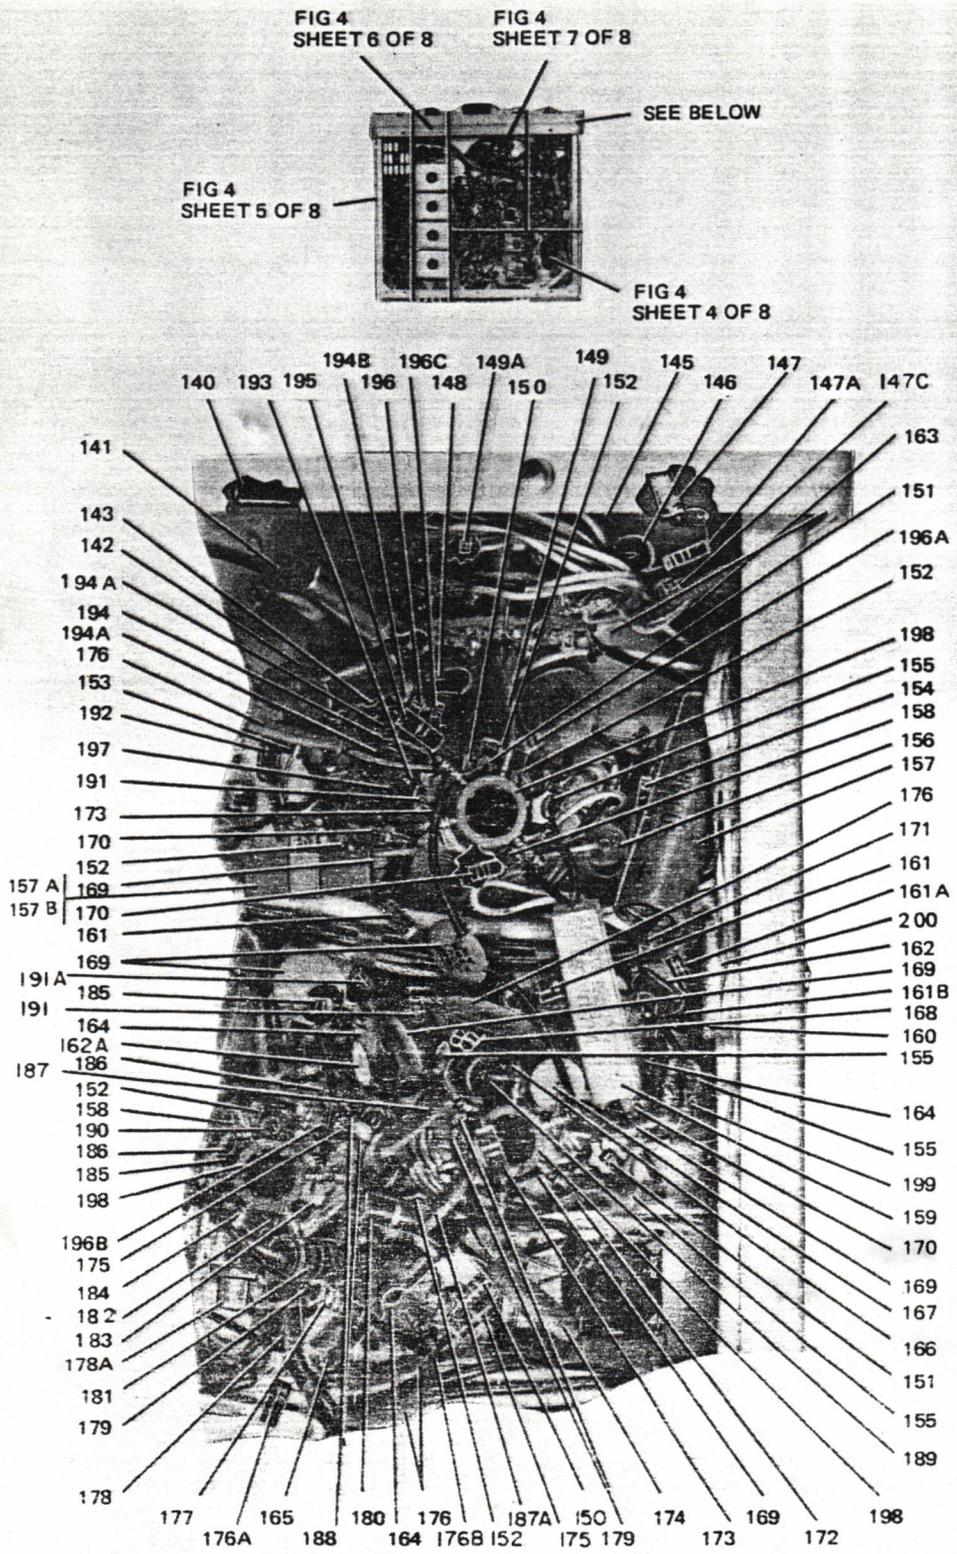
Transceiver Subassembly (Sheet 3 of 8)
